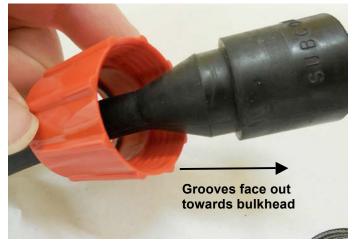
Twist Silver Locking Ring onto Motor Cable and Slide Red Collar onto Cable
